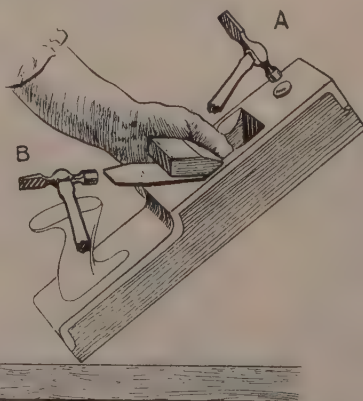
(A) RELEASING BLADE AND WEDGE. (B) ADJUSTING THE CUTTING BLADE.
